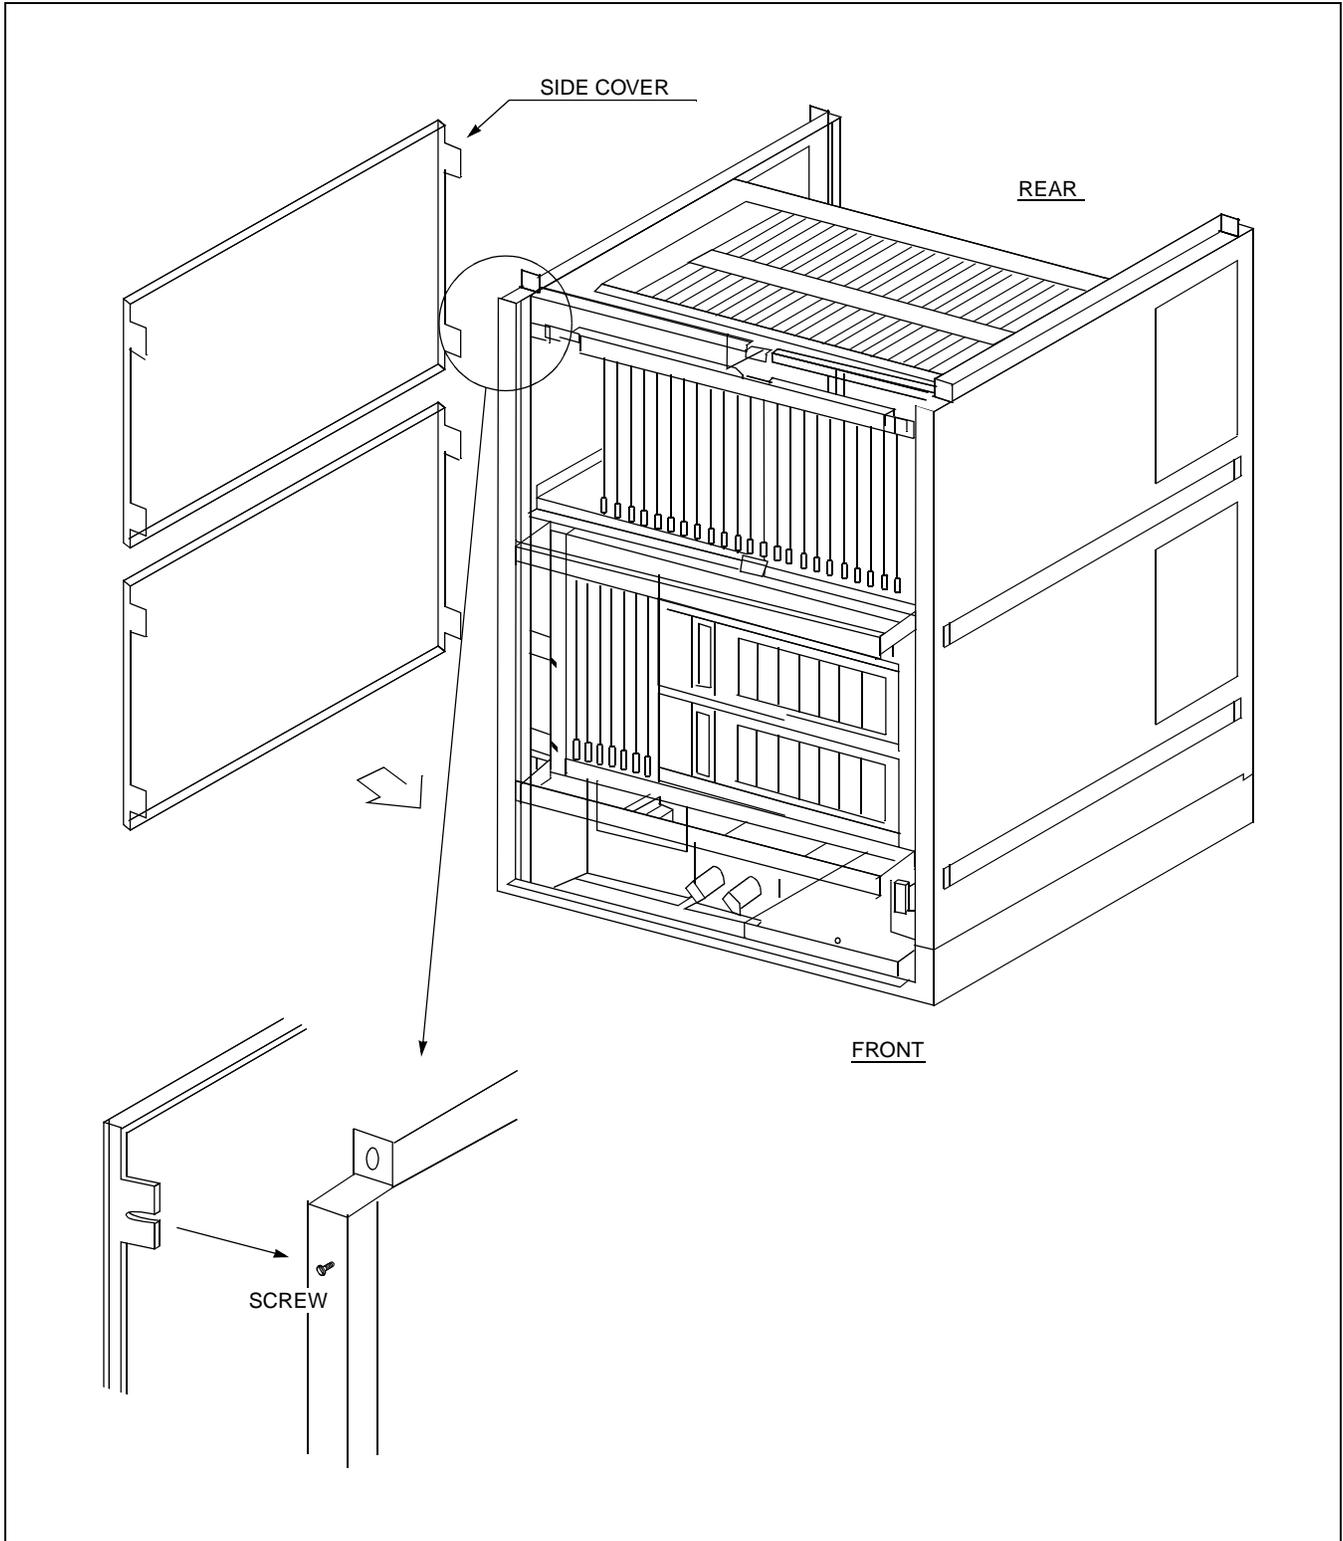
Side Cover Mounting Method (BASEU+LPM+PIM0)
